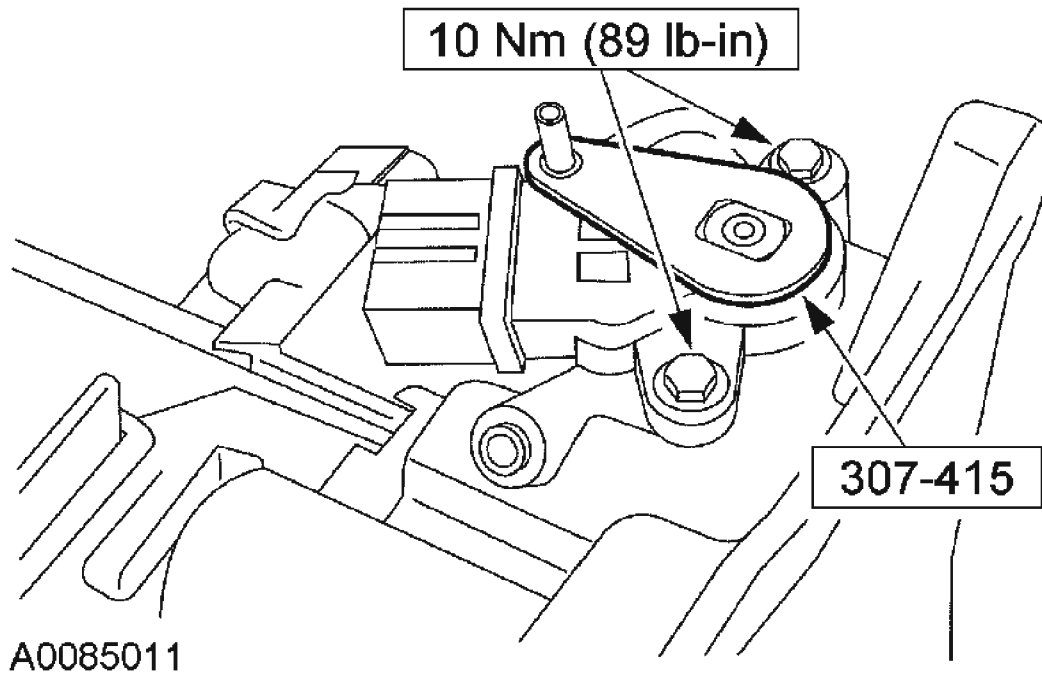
Aligning TR Sensor And Tightening Bolts Using Special Tool
